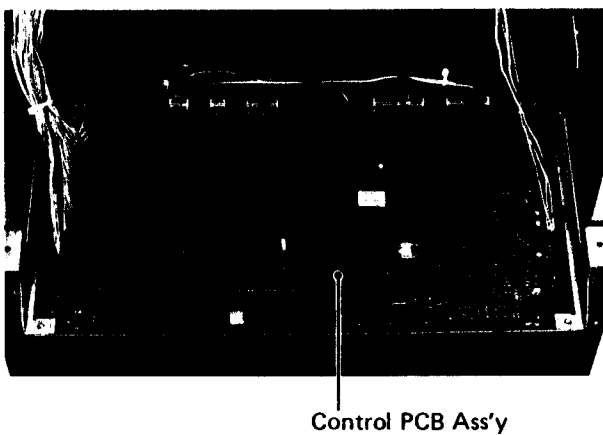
CONTROL PCB PULLED TOWARD YOU
